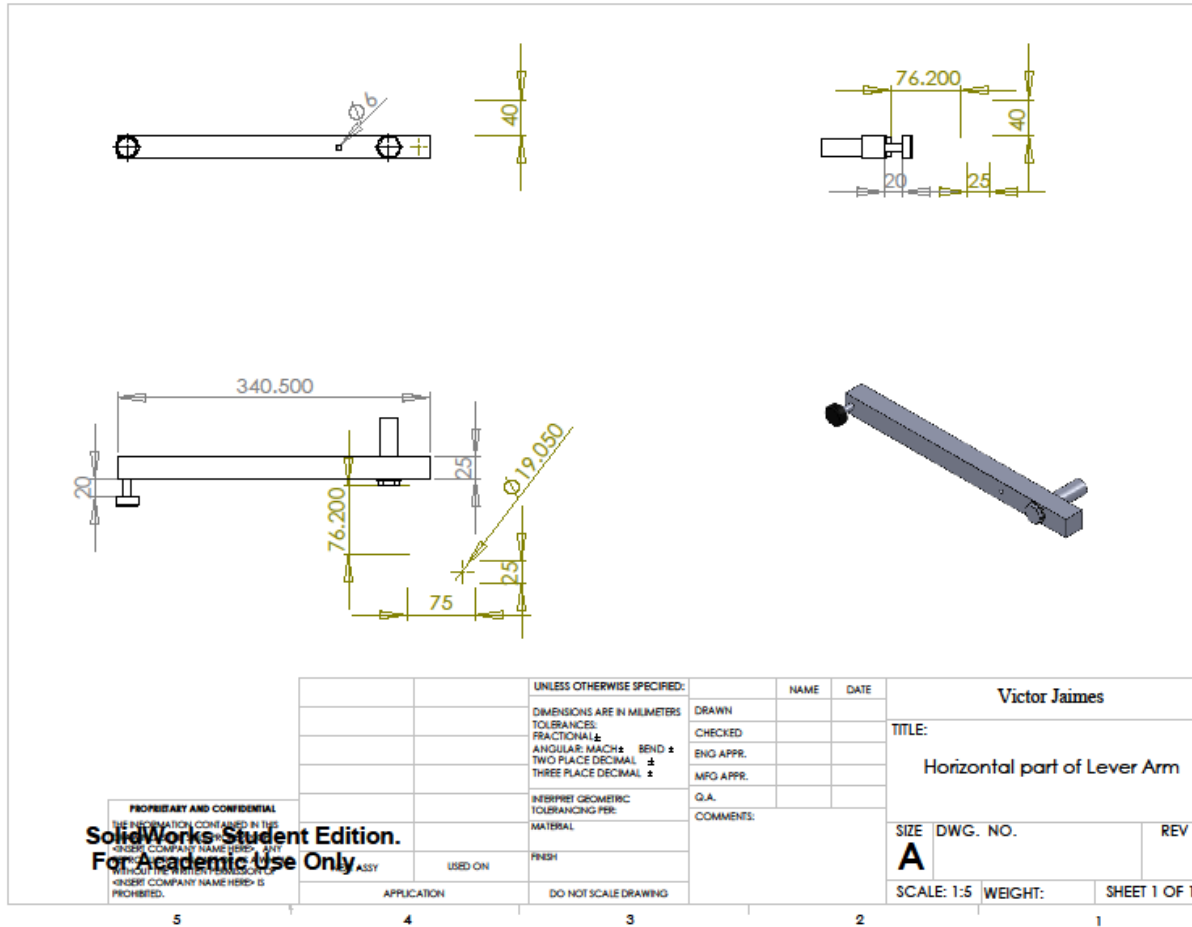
The Wet G65 apparatus (horizontal component of lever arm)
